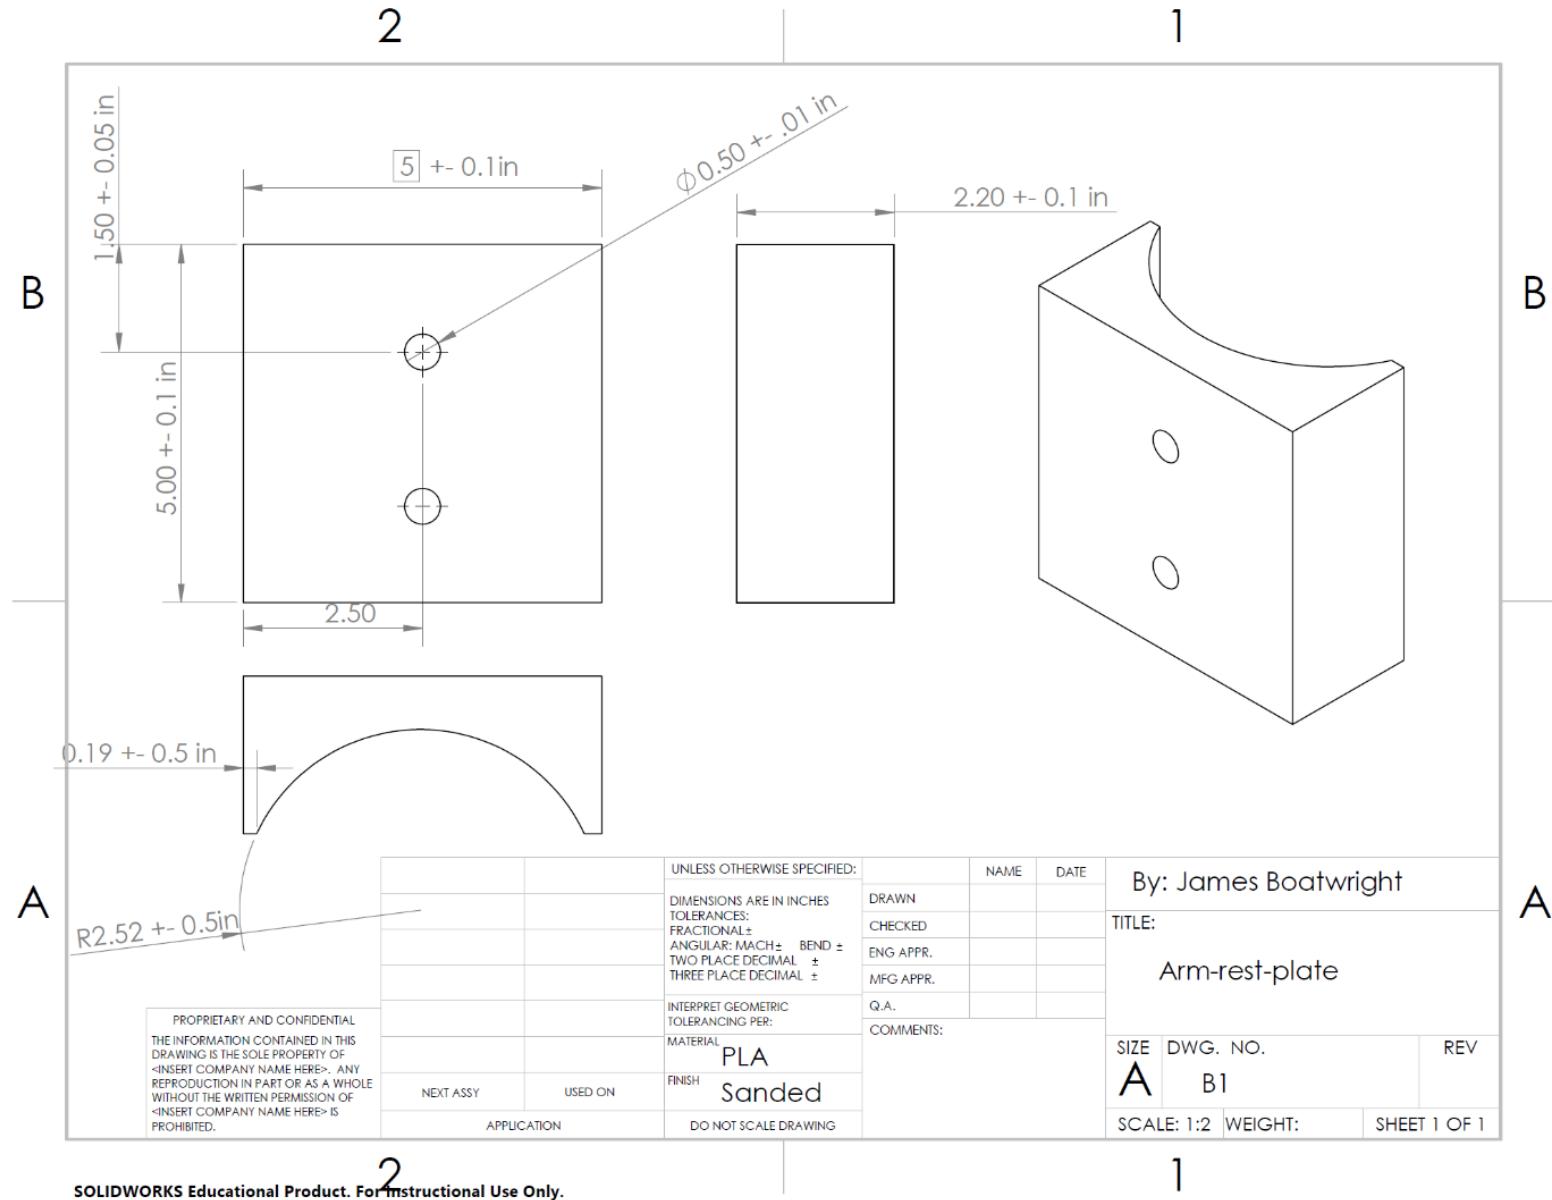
Arm Rest Plate Drawing and Tolerances
